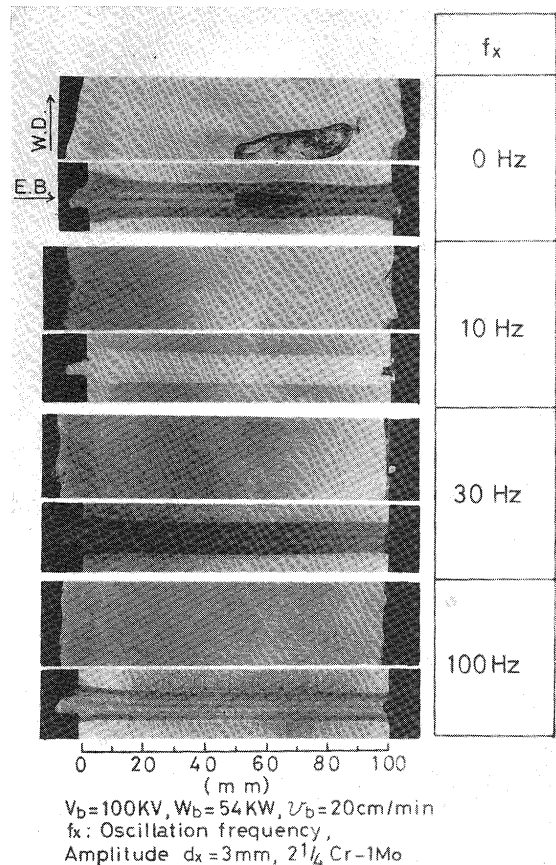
Fully penetrated bead section of horizontal position welding with various beam oscillation frequency.
